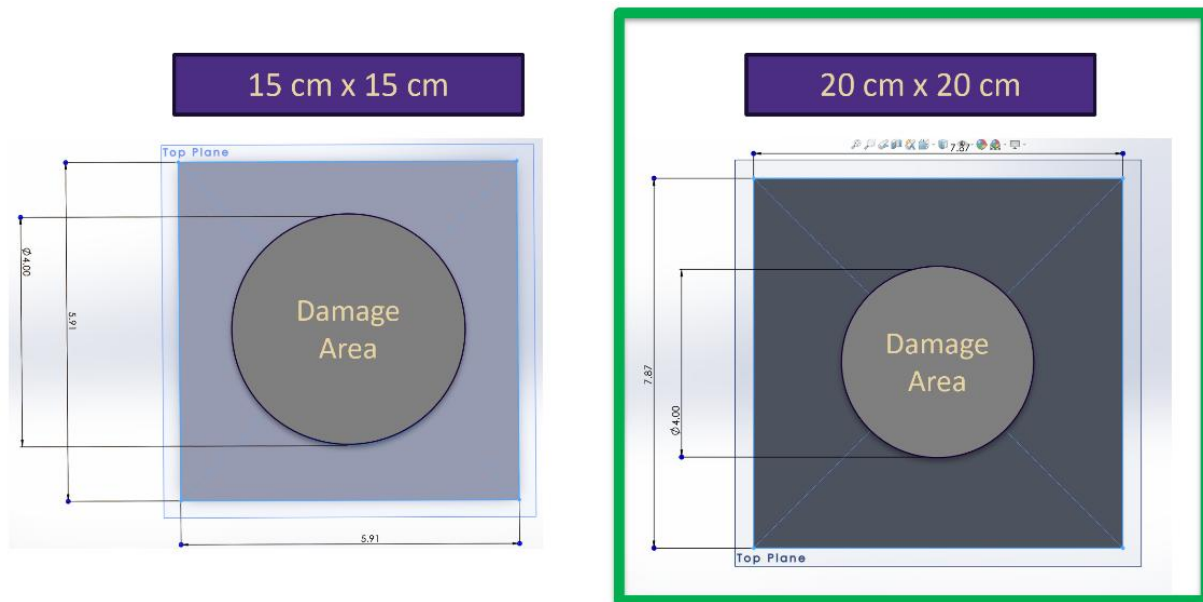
Specimen Dimensions with damage area (Actual Scale)
